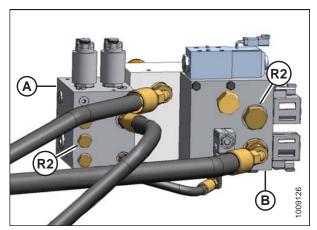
Valve Blocks with Reverser Valve in Factory Configuration
